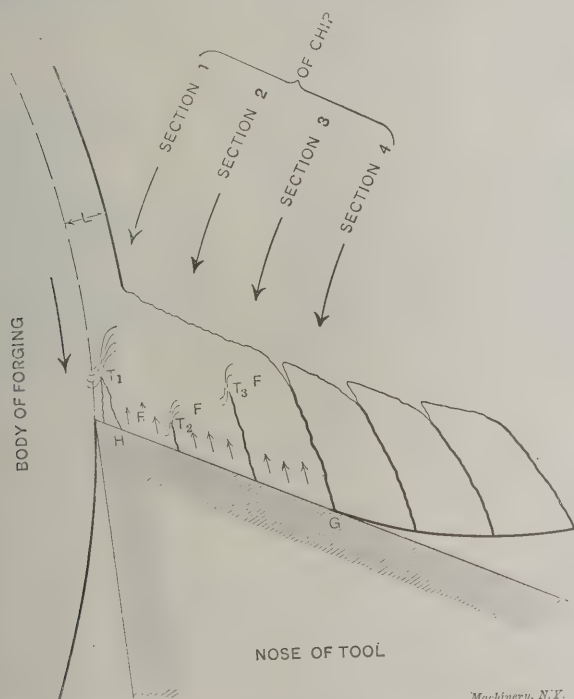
Showing how Chip is Partly Torn and Partly Sheared from Body of Forging.
